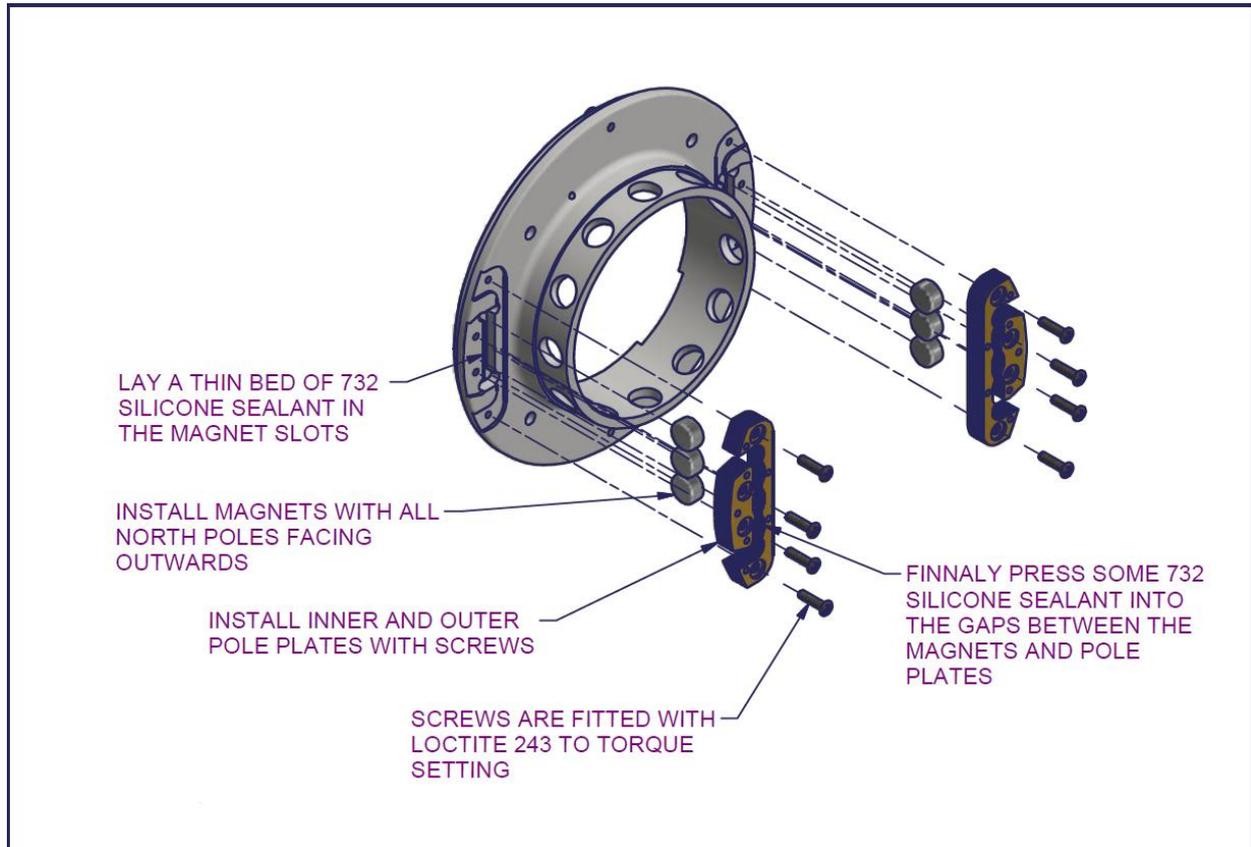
2200/3300 Flywheel subassembly (aluminium cross piece) 1
